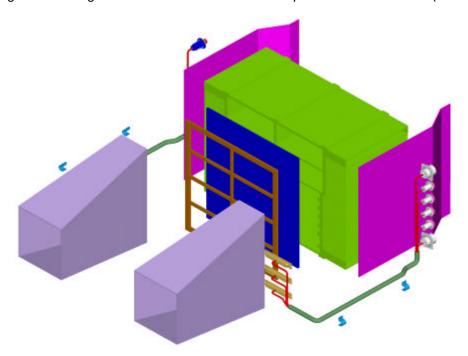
Integrate the CHASSIS with all the components connected to it (rear view)
